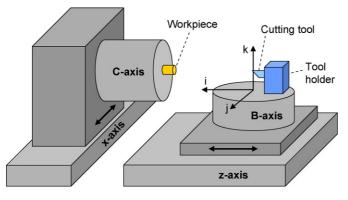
Schematic illustration of a T-based four-axis diamond turning machine.
